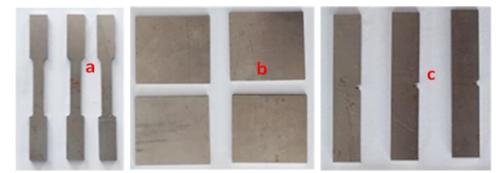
a – Tensile test specimens, b- Compression test specimens, c – Impact test specimens used for mechanical testing
